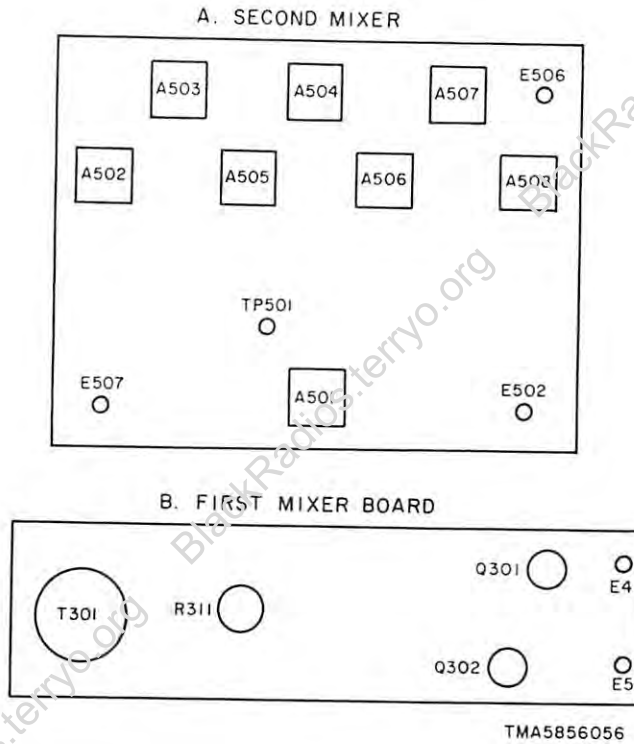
1ST AND 2ND MIXER ALIGNMENT PARTS LOCATION
